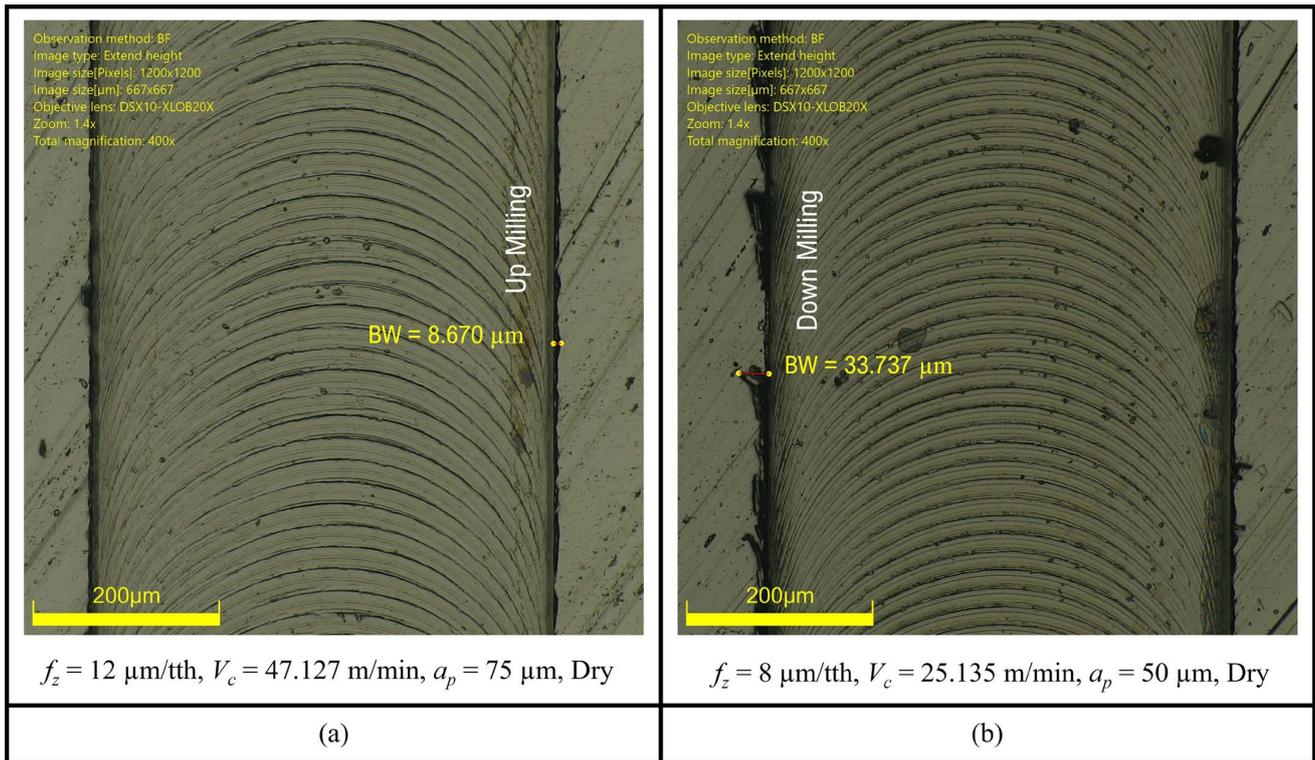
Measurement of burr width using digital microscope: (a) up-milling; (b) down-milling.
